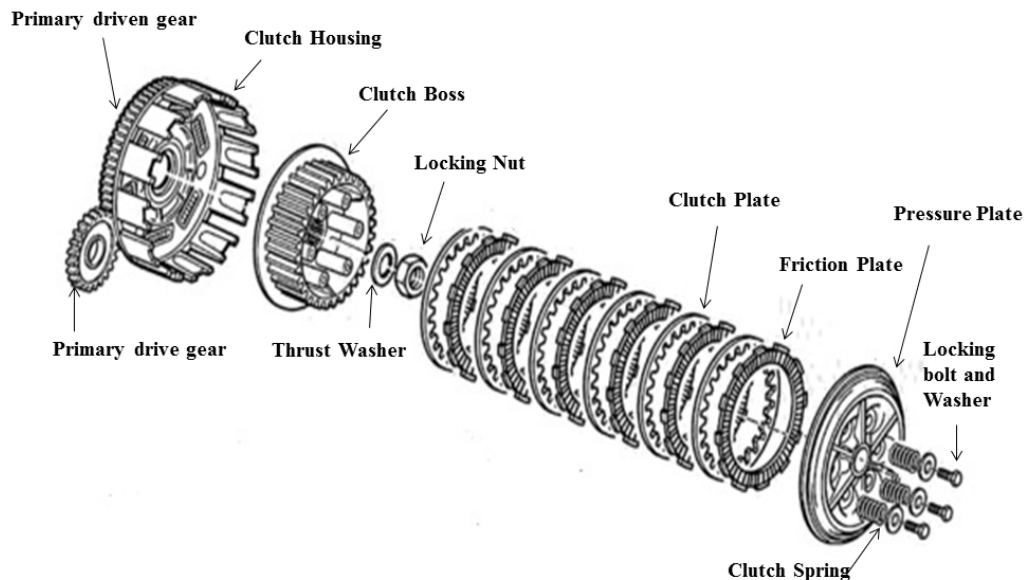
Exploded view of of Multi-Plate Clutch assembly
